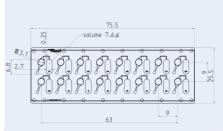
Detailed schematic drawing of the suspension cell chip Fluidic 1471
